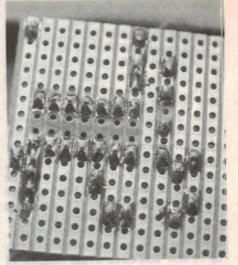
The copper side of a piece of Vero-board with our EA-Thing project wired up.
